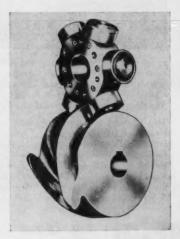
Cam-operated indexing mechanism has a roller gear drive
